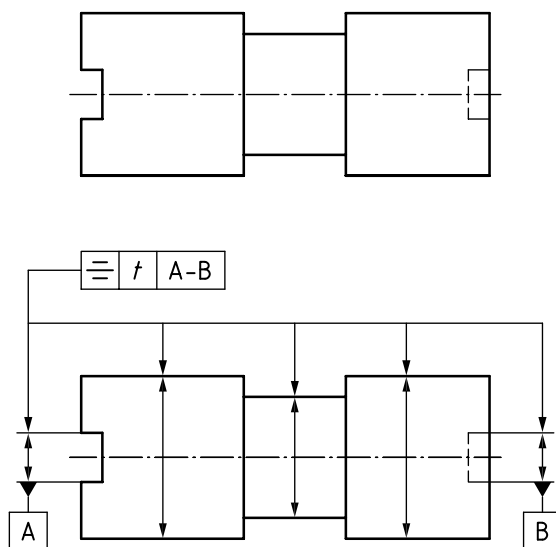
Drawing and meaning of general symmetry tolerances, common datum, one datum cylindrical
